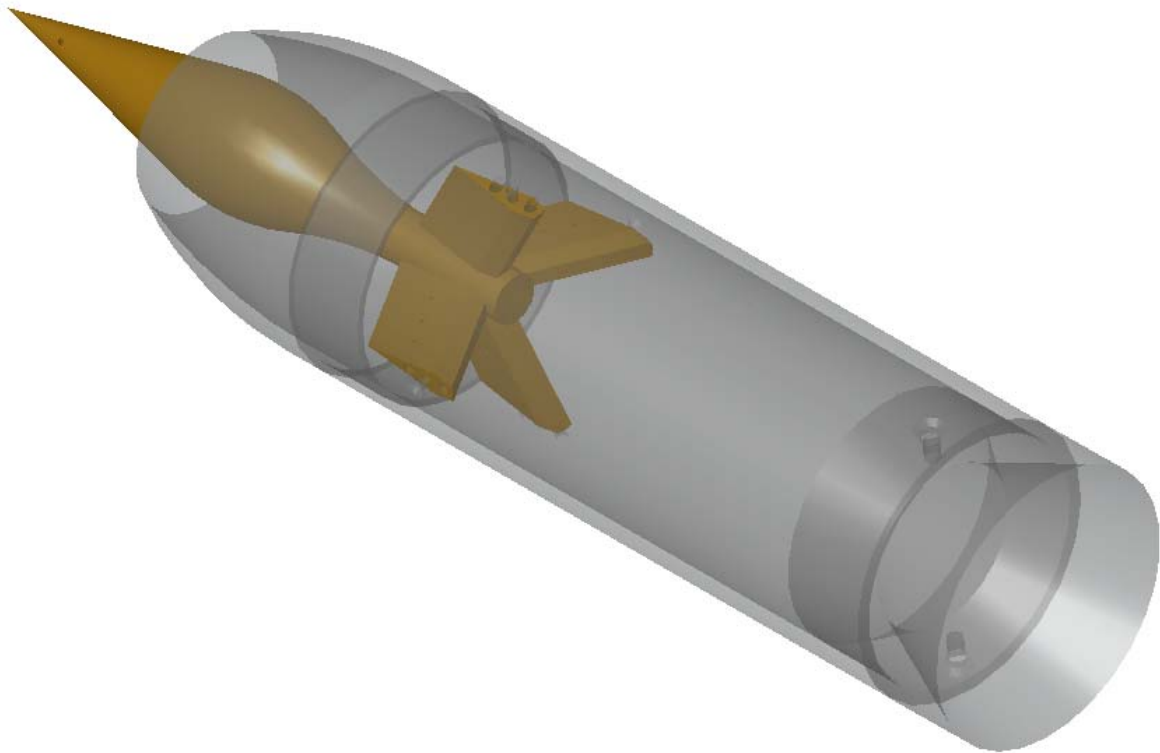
Assembled ramjet showing all parts. Image from SolidWorks.
